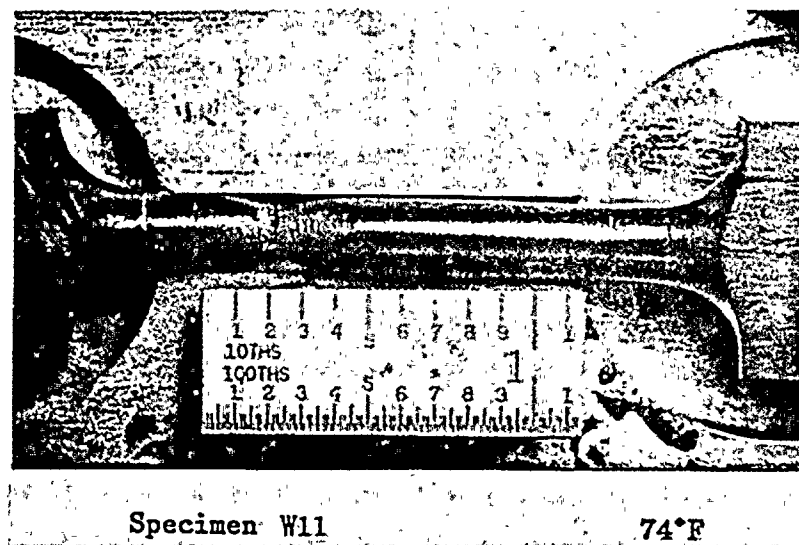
FRACTURED TENSILE SPECIMENS FOR D. C. COOK UNIT 1 REACTOR VESSEL WELD METAL
